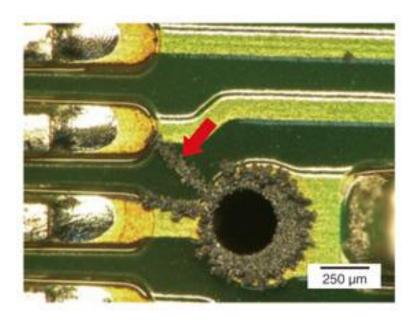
Short in adjacent solder hole and bus line as a result of surface deposition [20]
